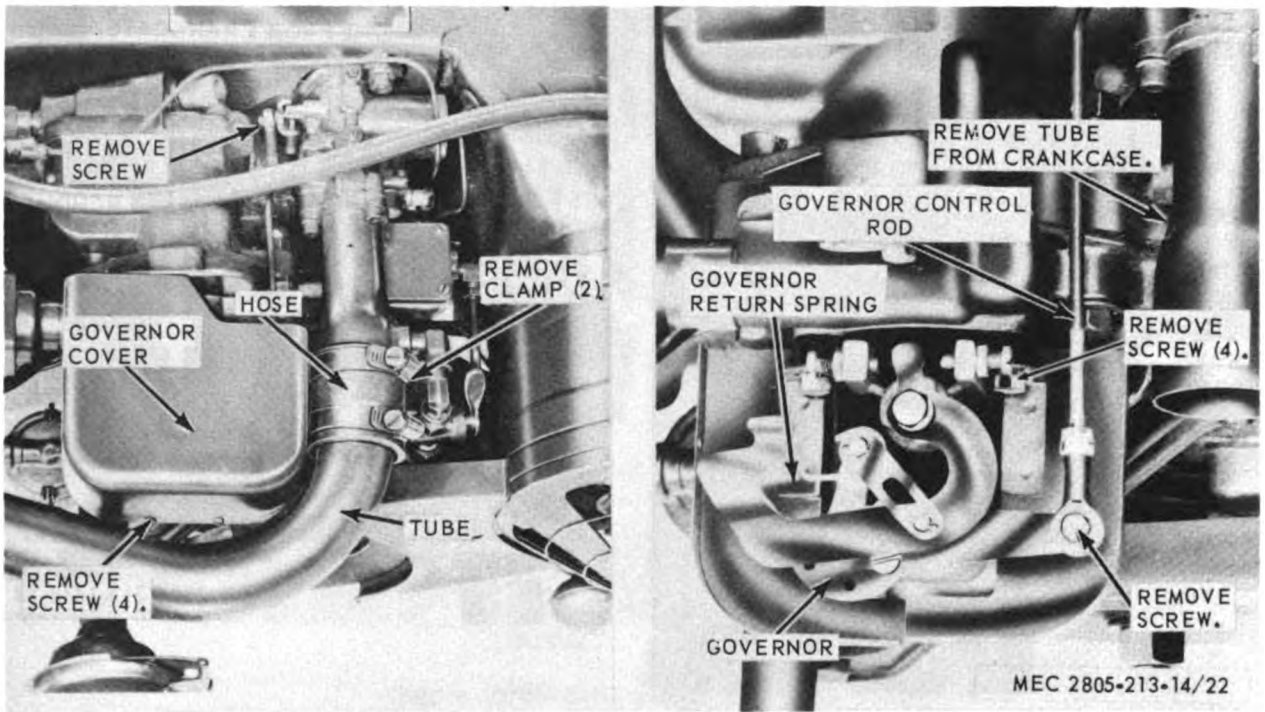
Governor cover, throttle control rod, and governor, removal and installation (Model AO4S-KM).
